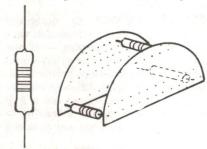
Cut the resistor leads as shown at left and then solder three resistors to two half-discs as shown to make a rigid assembly.
